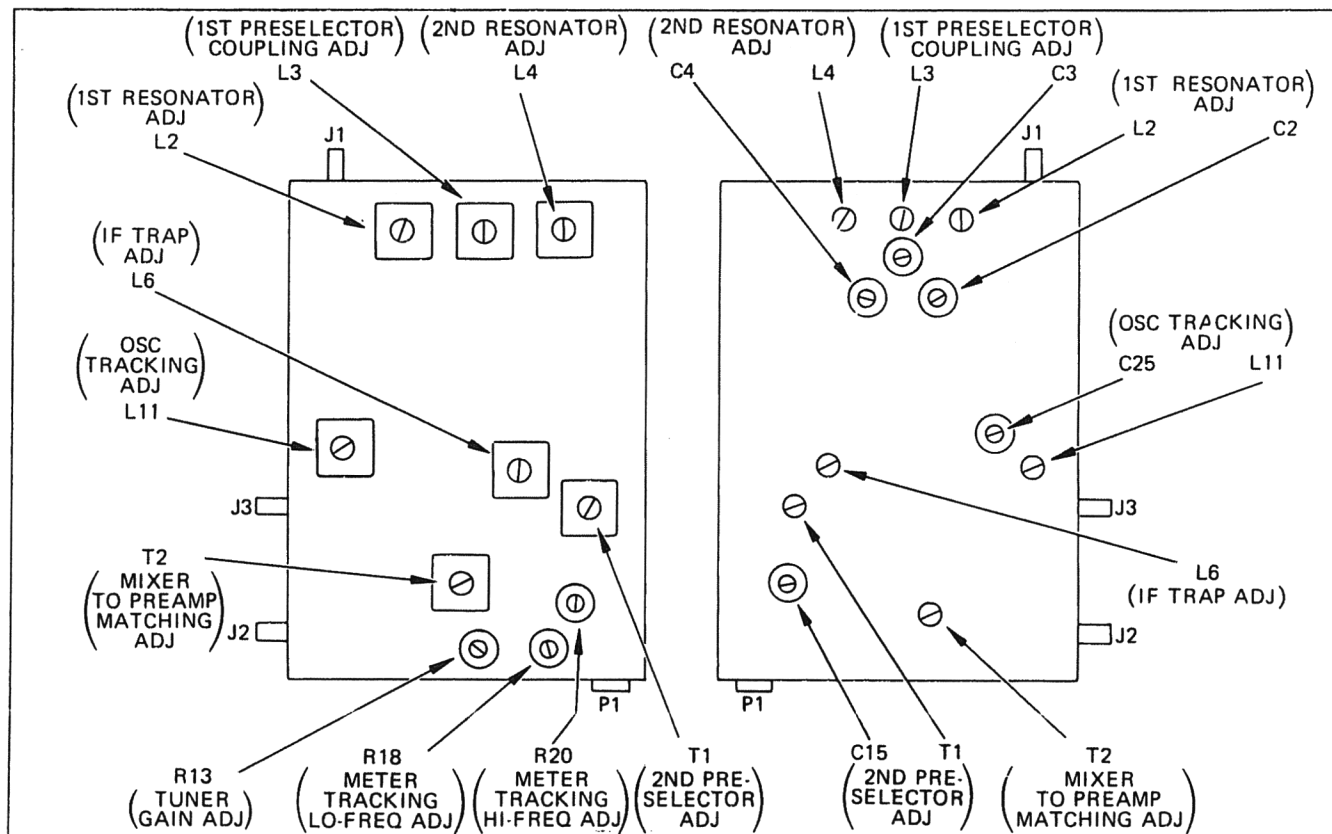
Trimmer Locations, Band 4 Tuner Assembly, A4
